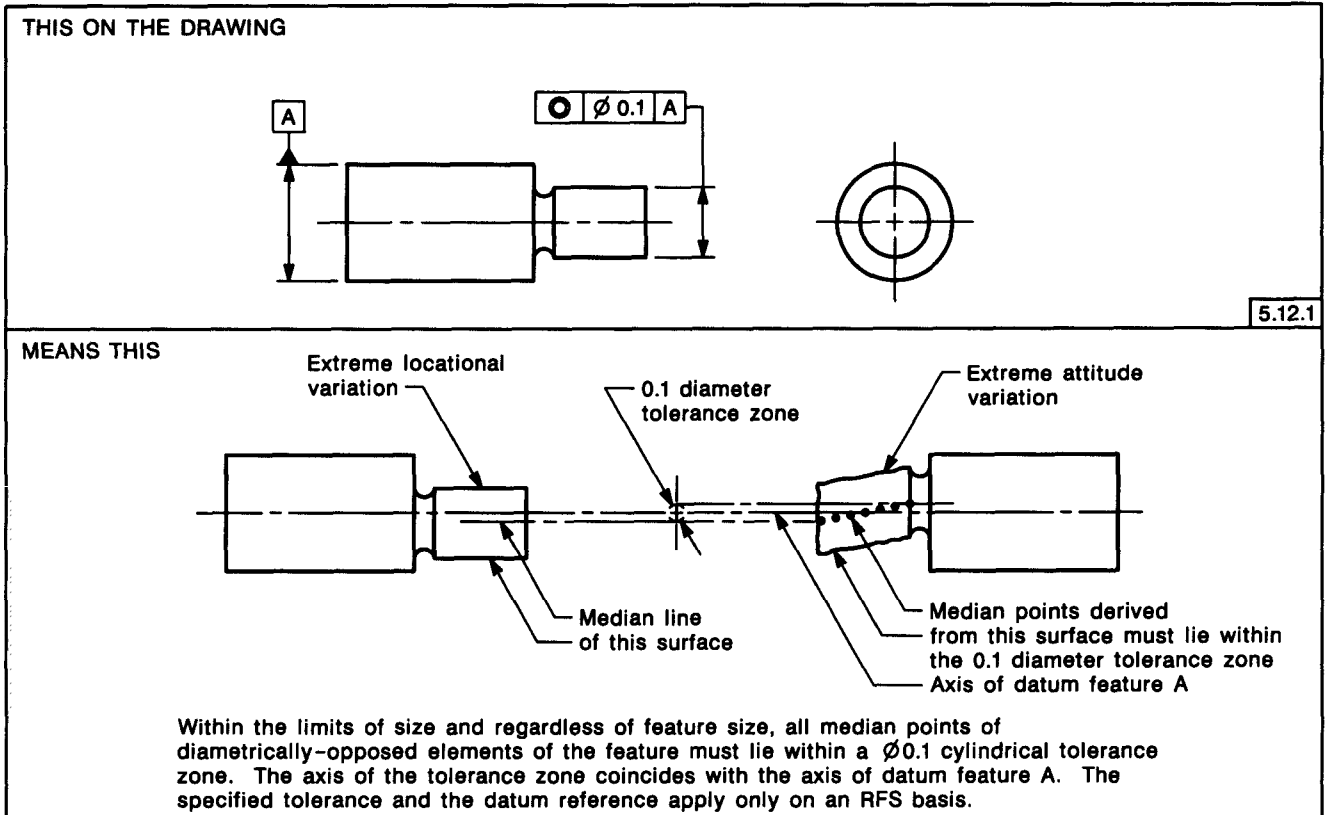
CONCENTRICITY TOLERANCING
